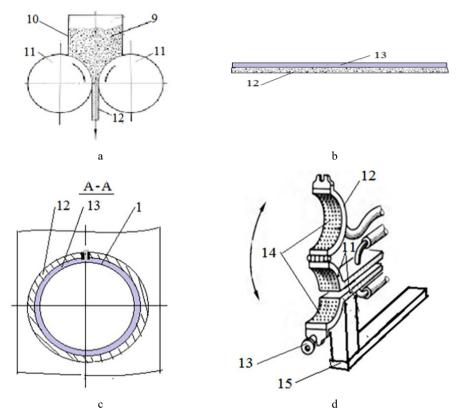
Production of repair plates, mounting on necks and an inductor for soldering: a - a device for making a repair plate by powder rolling; b - prepared repair plate with a layer of solder fat applied (side view); c - installation of a plate with soldering fat on the neck; d - inductor for soldering). 9 - hopper, 10 - a mixture of brass powder and powders of hard alloy materials in the form of tungsten carbides, titanium, etc., 11 - rollers, 12 - repair plate, 13 - a uniform layer of pasty flux from soldering fat, borax and brass powder, then in the tool holder 3, a detachable inductor is installed (Figure 3, d), containing fixed sections 14, detachable part 15, latch 16, holes for cooling water outlet 17 and water supply hoses, fastening 18.
